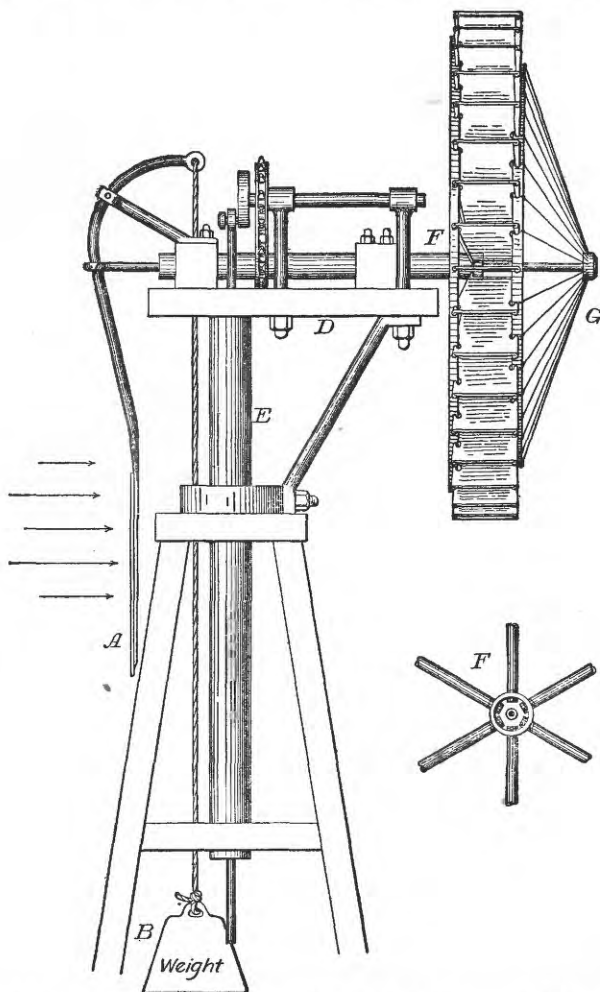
Sketch of homemade steel turbine of W. F. Baldwin, Ainsworth, Nebraska. *A*, Regulating fan and lever; *B*, Weight holding the mill in gear; *D*, Platform revolving about gas-pipe axis *E*; *F*, Windmill head with gas-pipe arms.
